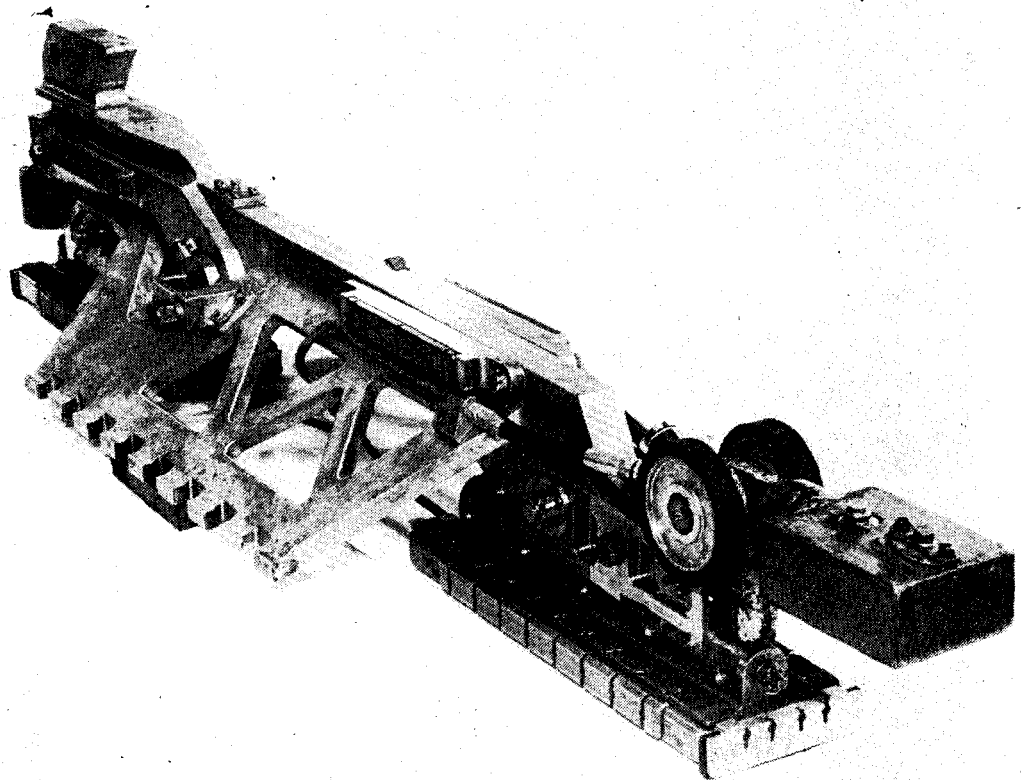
A B.S.5 CENTRE RAIL SHUTTLE ASSEMBLY
